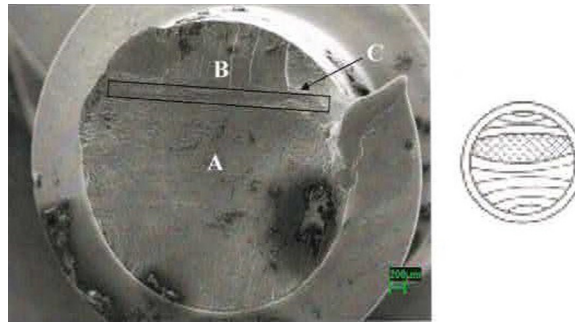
Fractography. Headless screw fracture surface [26].
